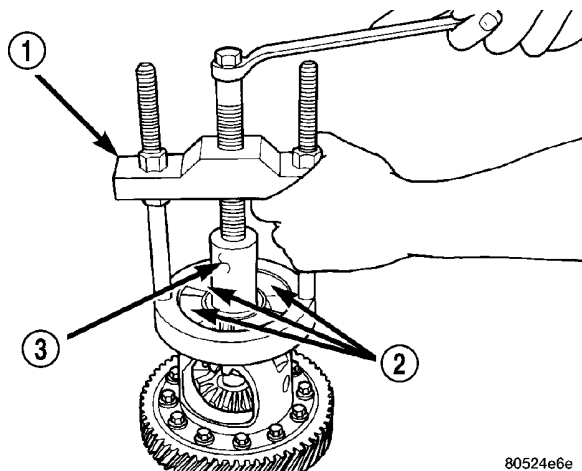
Remove Differential Bearing Cone (Extension Housing Side)
